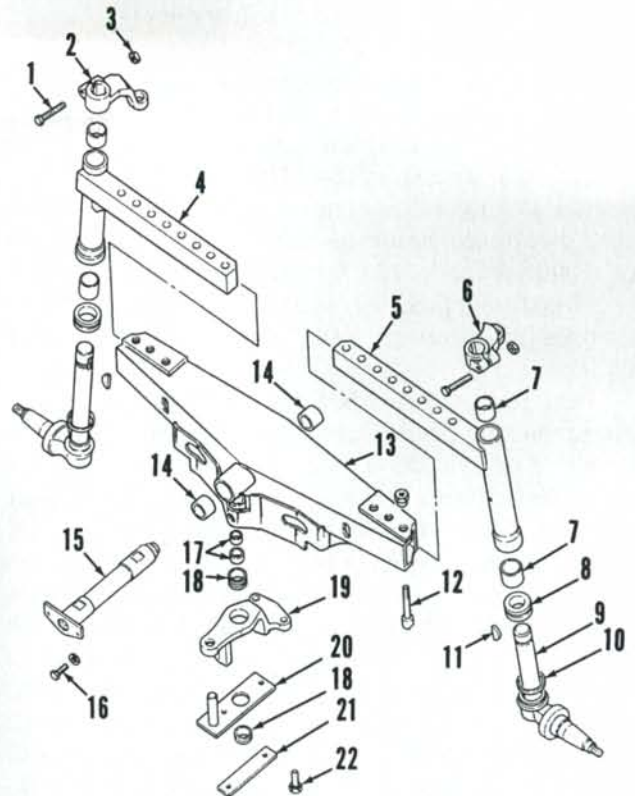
Exploded view of heavy duty straight adjustable front axle used on some tractors. Refer to Fig. 3 for legend.
